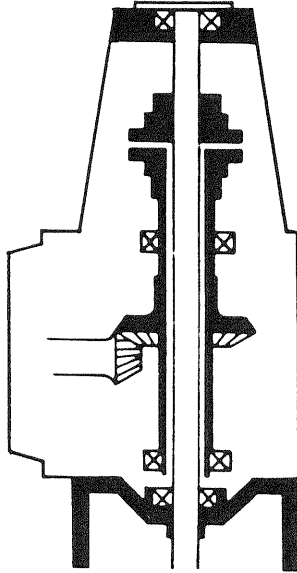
B Quill shaft and mixer shaft are joined by flexible, taper grid coupling
